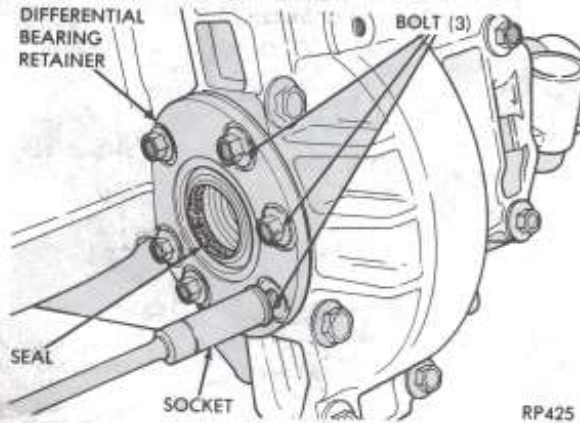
Remove or Install 3 Differential Bearing Retainer Outer Bolts (A-520/A-555)
